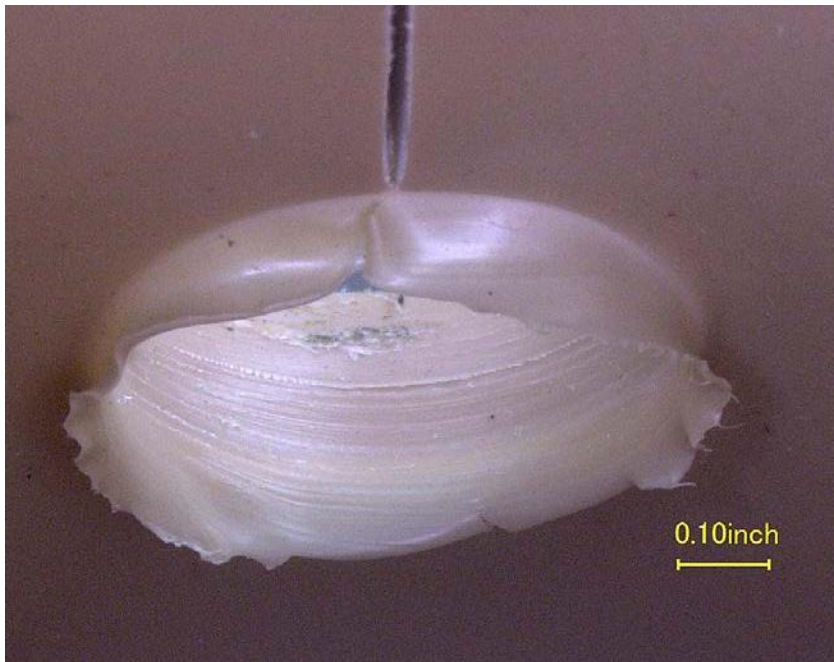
Photograph of the exposed inner surface of the main after disassembly of the tee showing the pierced hole made by the cutter tool. Note the fine circular cut marks within the pierced hole.
